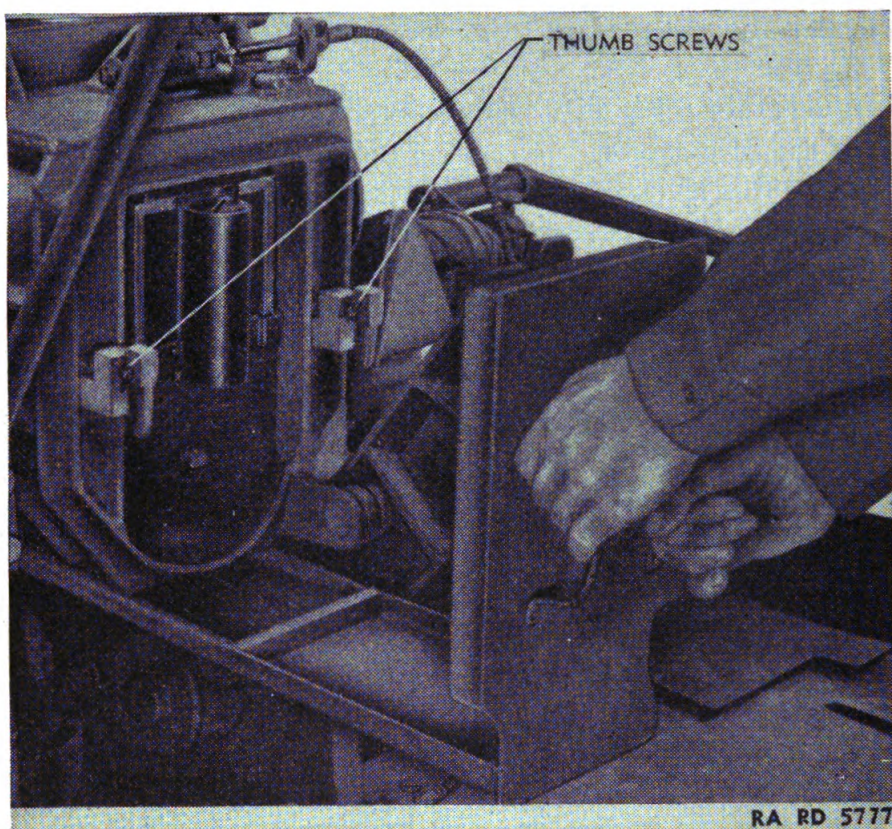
Removing cradle shield slide from M3A1 carriage.
